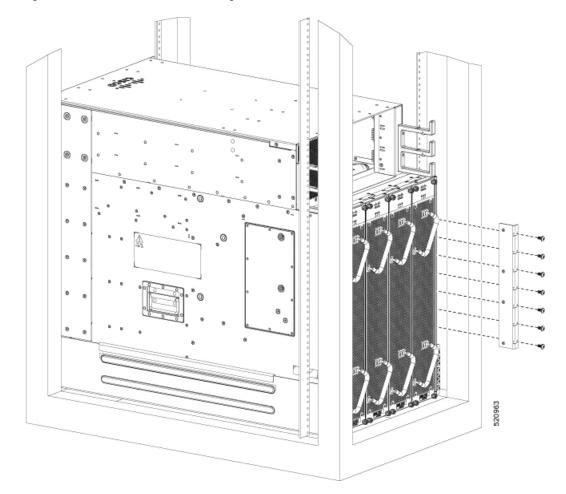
Attach 8808 Chassis to Rack - Rear Right View
